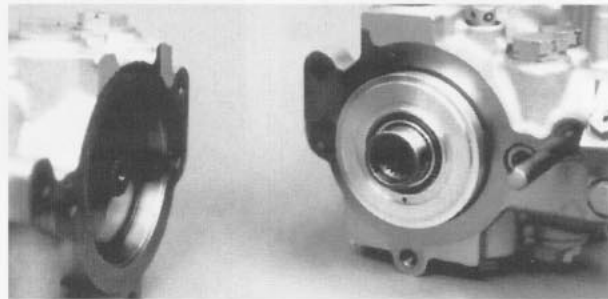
O-Rings Installed Between Sections (Later Production Shown)
